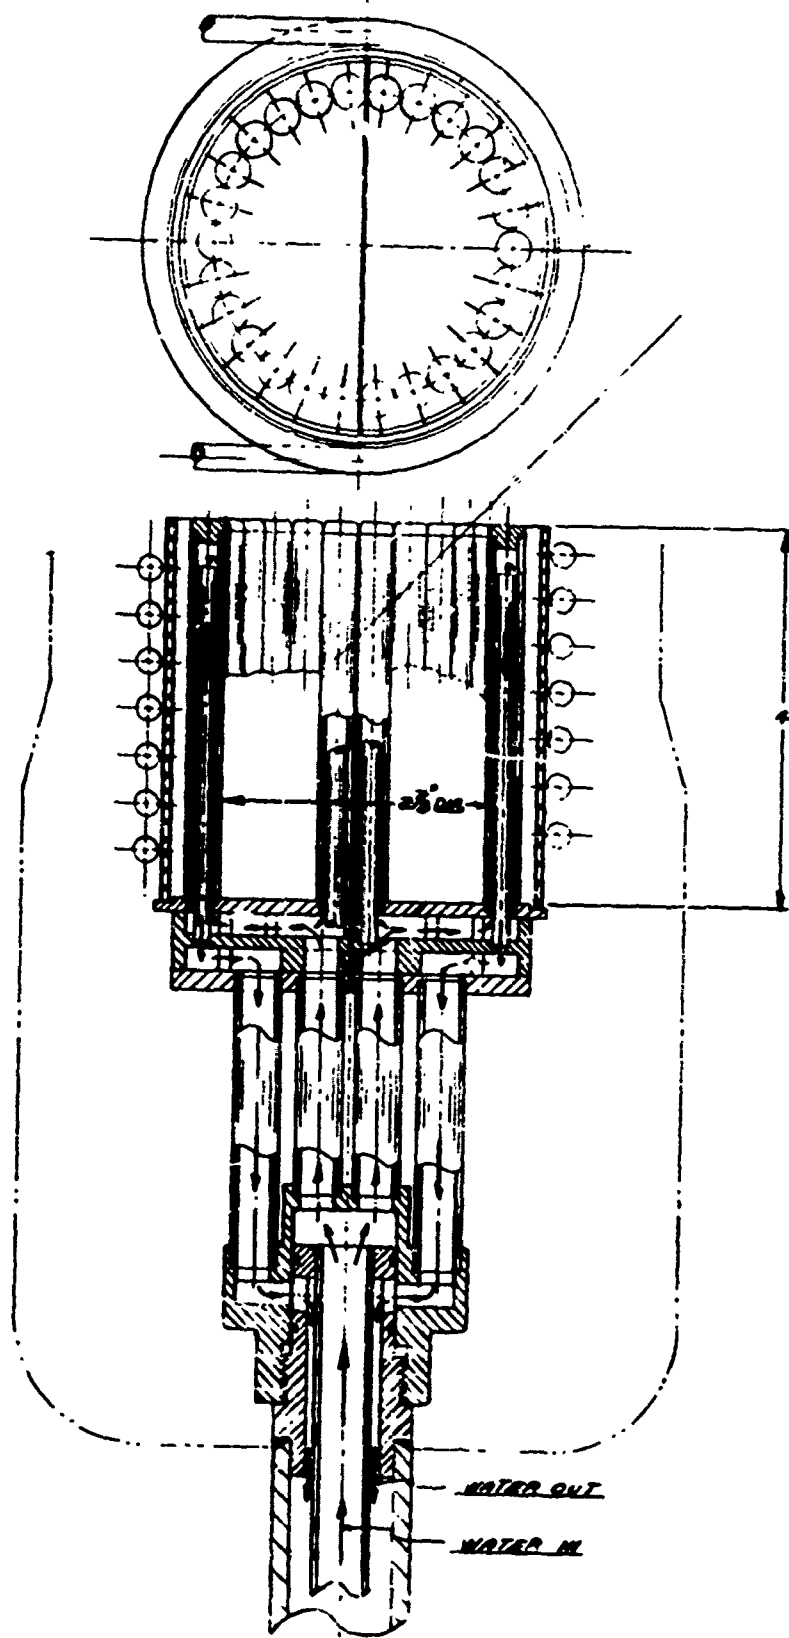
ADL COLD CRUCIBLE ASSEMBLY
